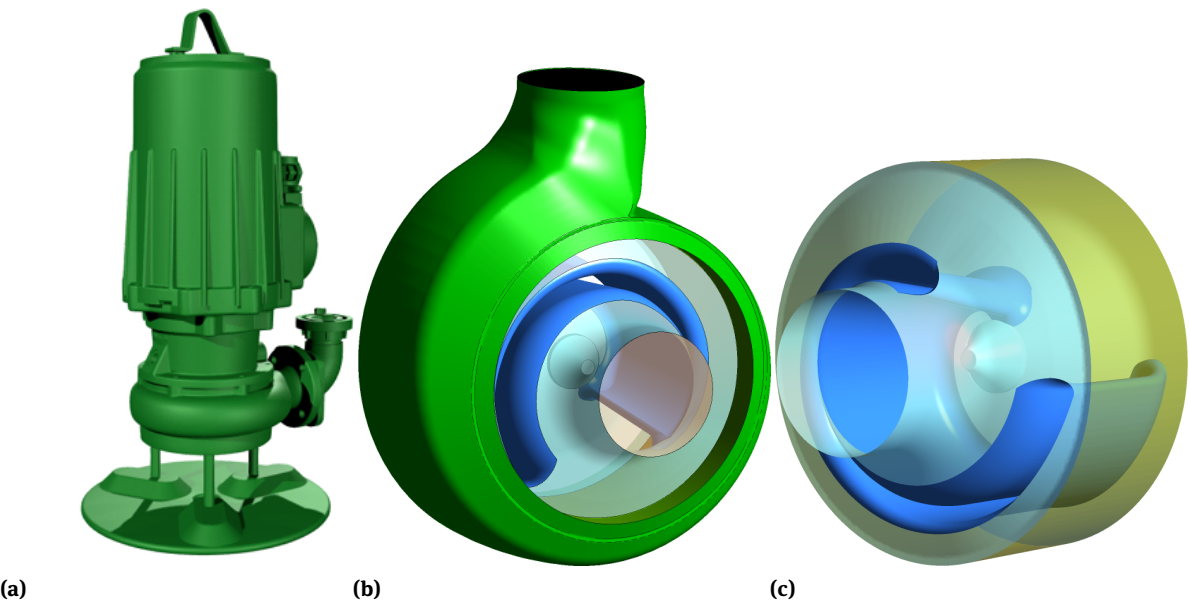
3D model a) single-blade pump b) impeller and volute; c) impeller
